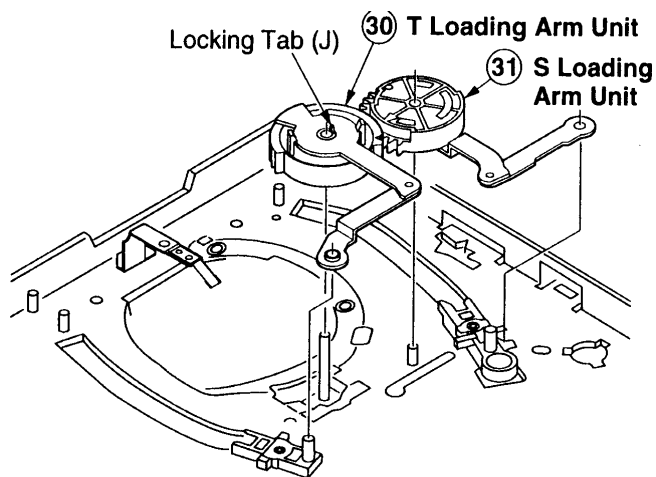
T-Loading Arm Unit/S-Loading Arm Unit Removal
